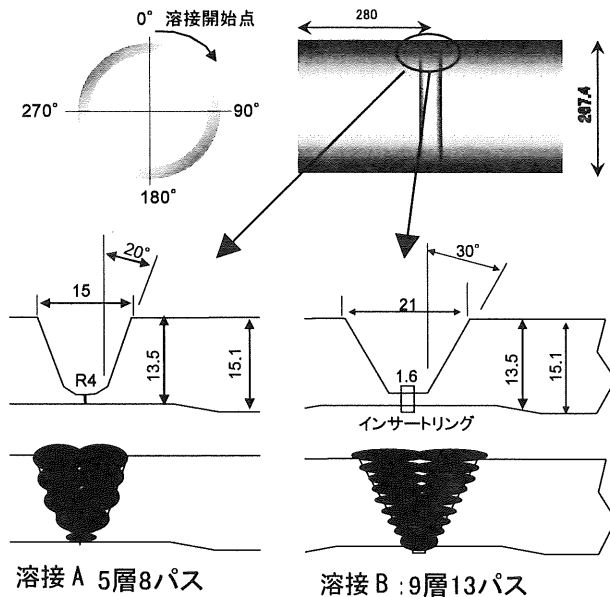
Geometries of SUS316 butt-welding pipe specimens and numbers of welding passes.
